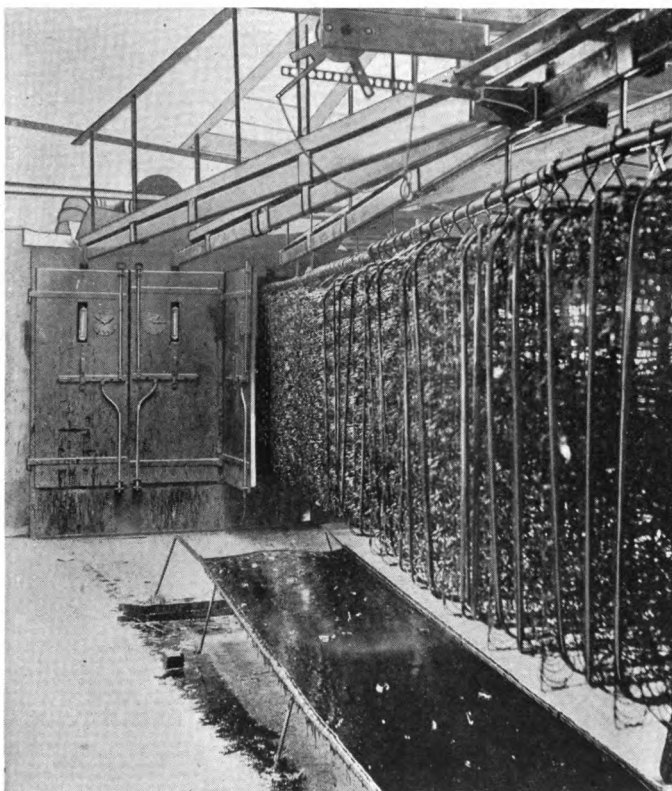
SPRINGS PASSING OVER DRAIN BOARD TO FILL ONE COMPARTMENT OF JAPAN BAKING OVEN
